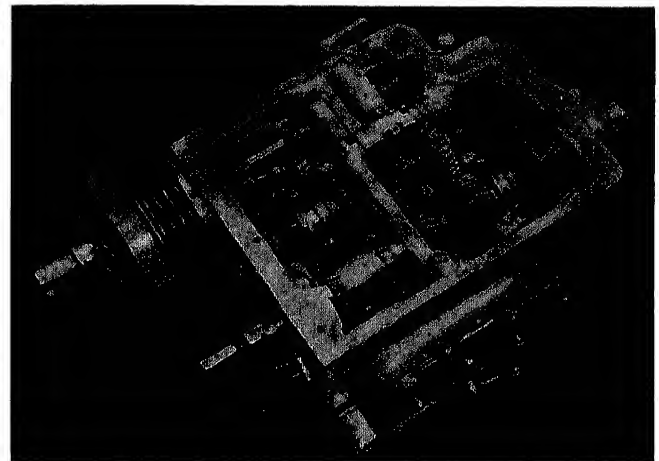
An all geared headstock with top cover removed. (Courtesy The Monarch Machine Tool Co.)
